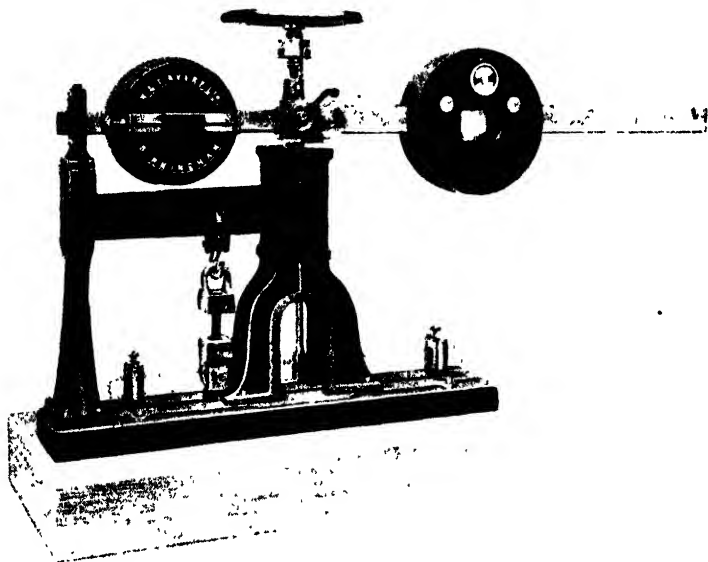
THE AVERY COMBINED TENSILE AND TRANSVERSE TESTING MACHINE FOR CAST IRON
